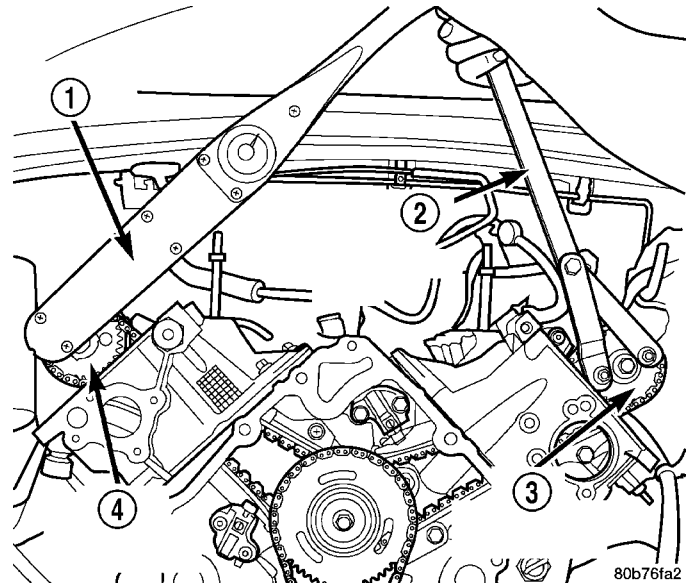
Tightening Right Side Camshaft Sprocket Bolt
